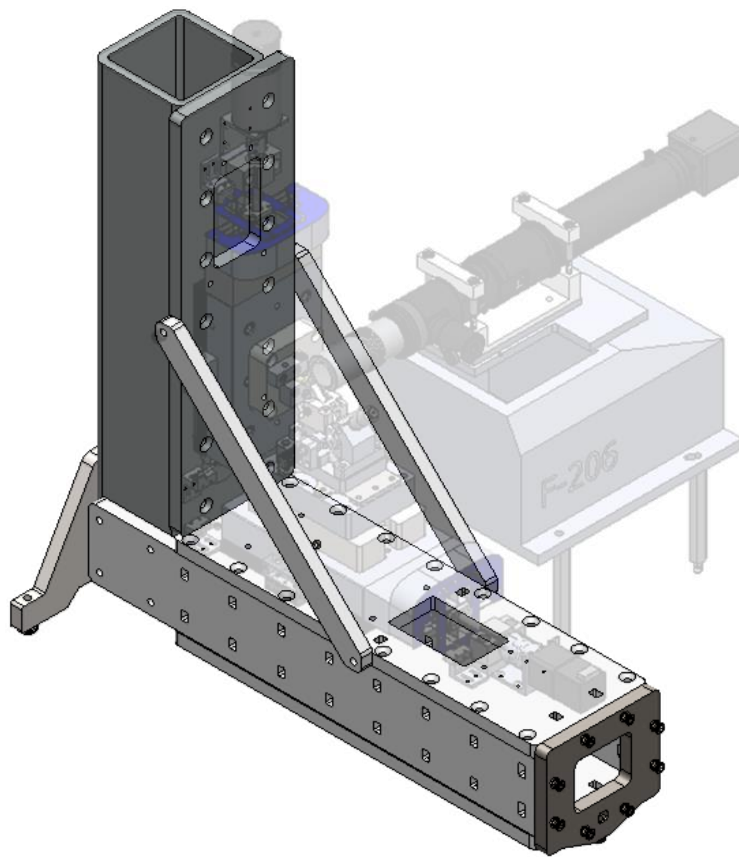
Instrumented cutter chassis subassembly, consisting of the basebeam and column subassemblies. Diagonal braces are shown, but were not used in the final assembly.
